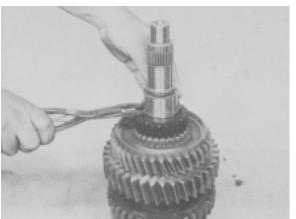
Remove 2nd & 3rd shift hub sleeve retaining ring.
